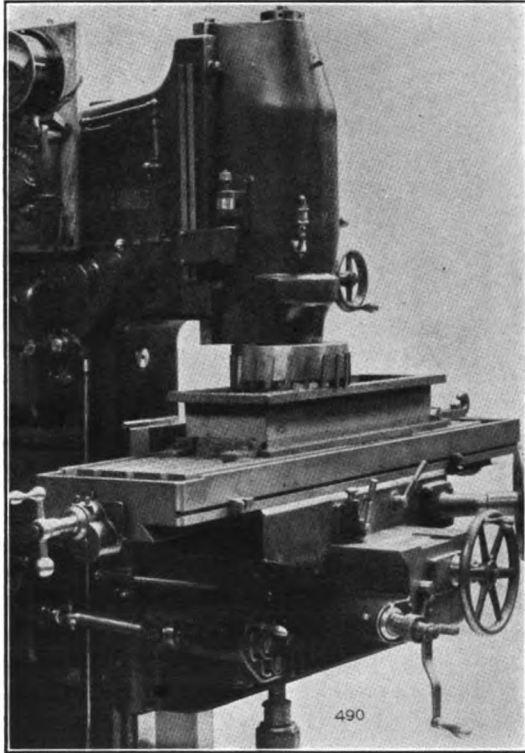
NO. 4 VERTICAL HIGH-POWER MILLER, CINCINNATI MILLING MACHINE CO.
